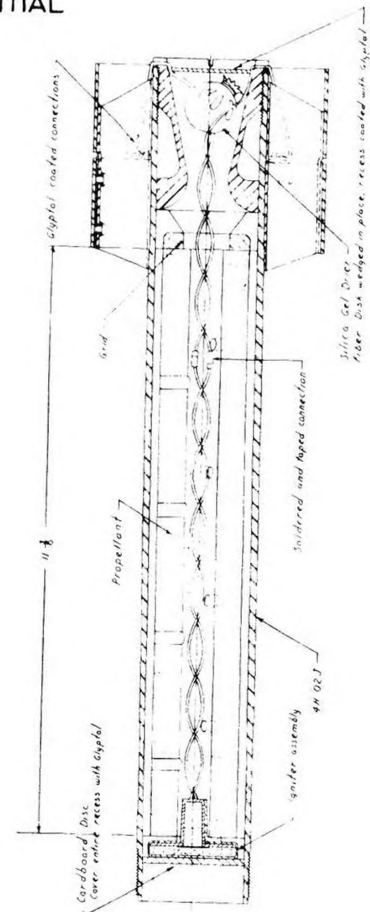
MOTOR AND TAIL ASSEMBLY FOR
